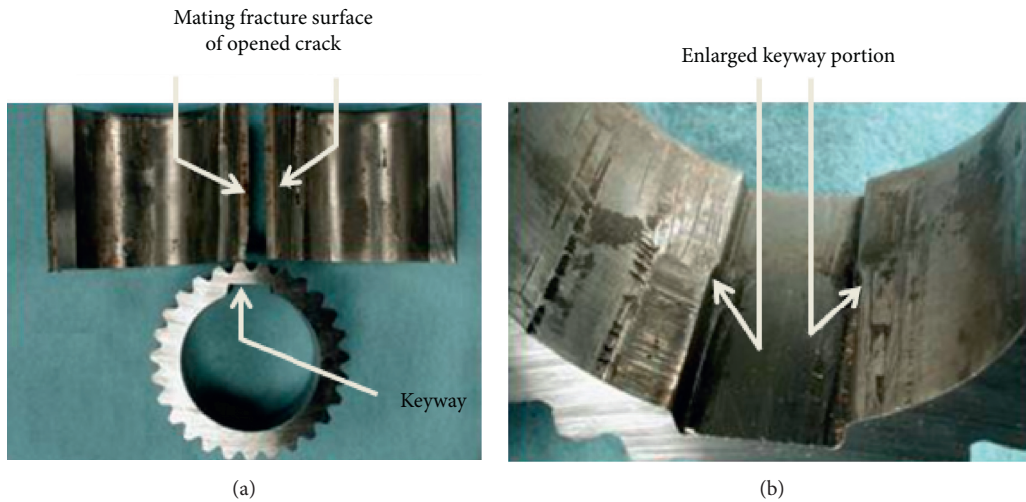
(a) Overview of longitudinal mode crack surface and the cross-sectional view of keyway at the nonfailed portion. (b) Enlarged keyway portion of gear.
